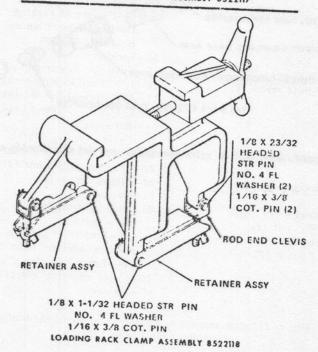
Loading rack clamp assemblies — disassembly and assembly.
